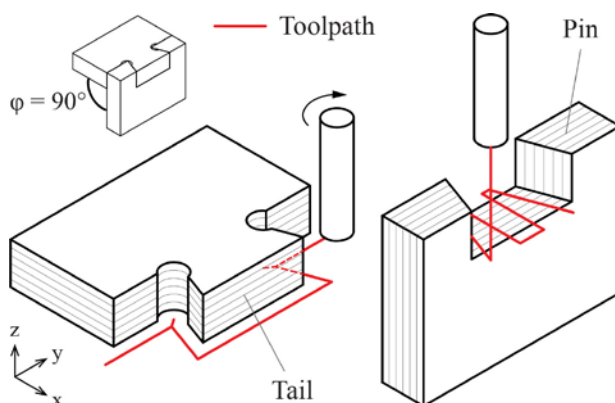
Fabrication of dovetail joints with 3-axis CNC technology, limited to orthogonal joints between plates.
